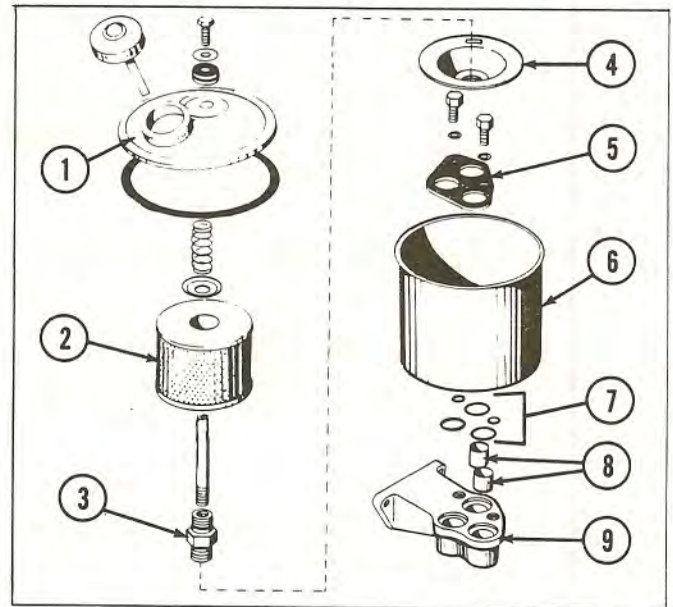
Reservoir Assembly - Identification and Sequence of Parts
